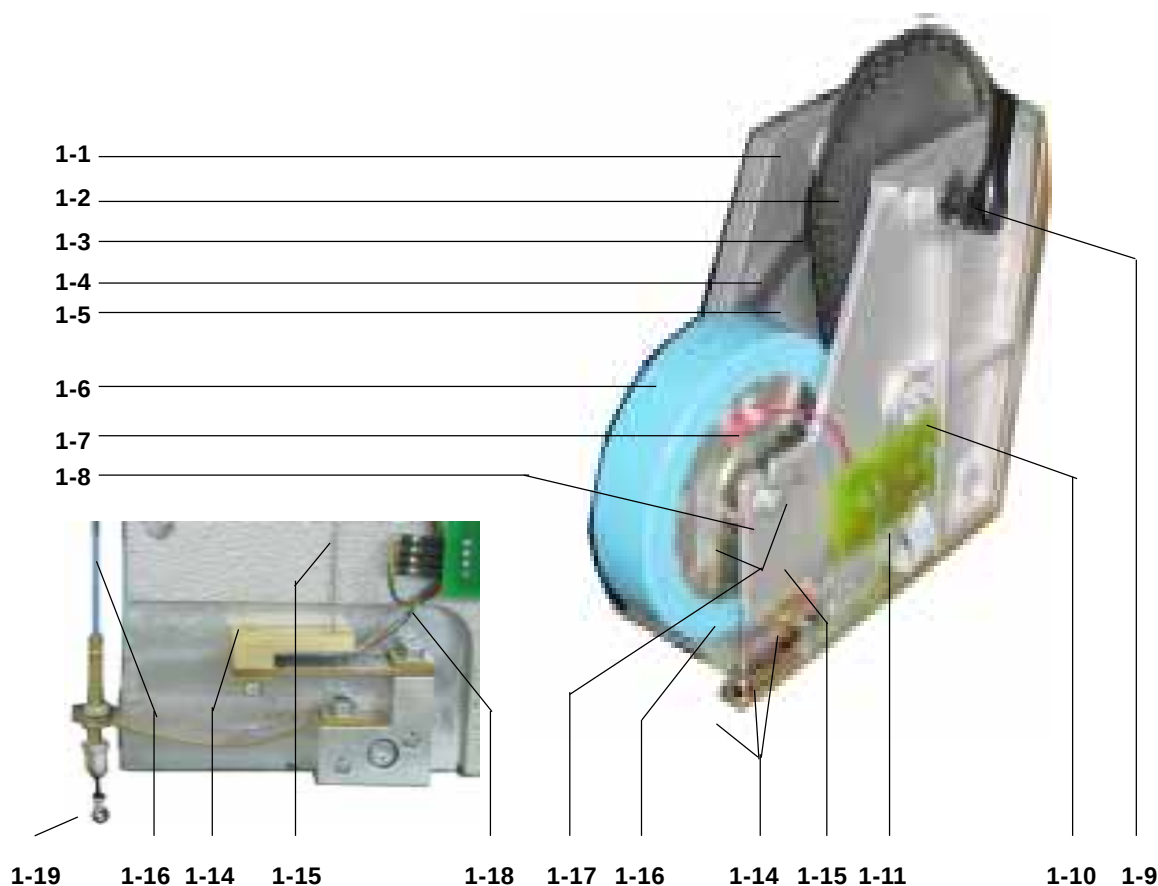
Mechanical Overview: Load Unit with PCB RPM and Strain Gauge
